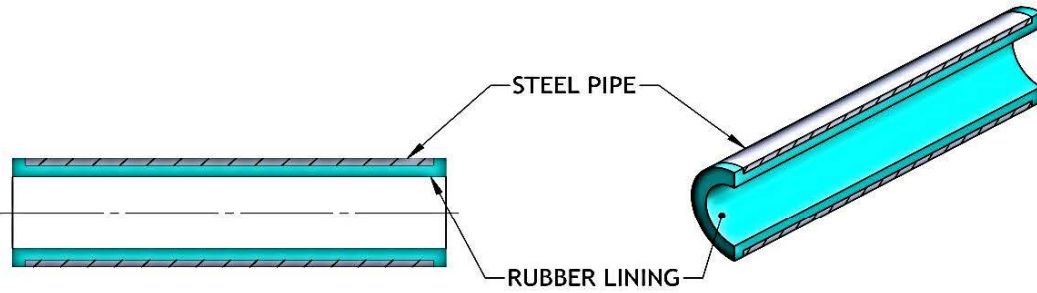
Rubber lining construction for Victaulic pipe (Single grooved pipe)
